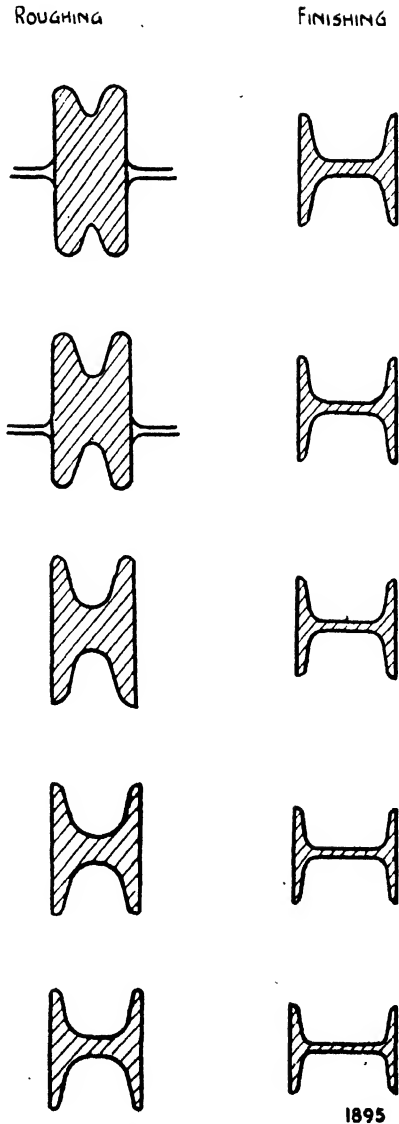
STAGES IN THE PRODUCTION OF A STEEL GIRDER SECTION
